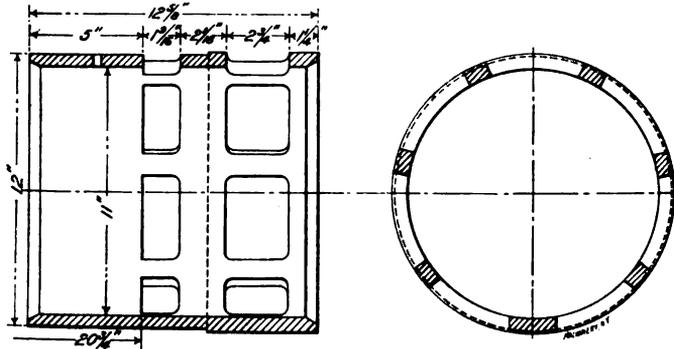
Valve Chest Bushing for Atlantic Type Locomotive
